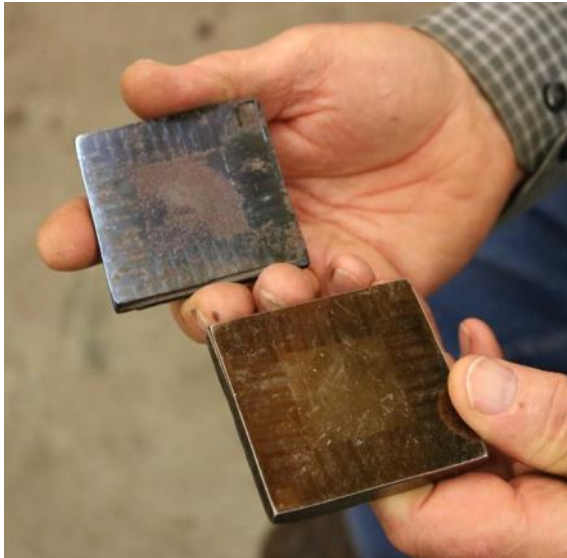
Cut off box ends showing an example of a different pattern by packing layers perpendicular to each other.
